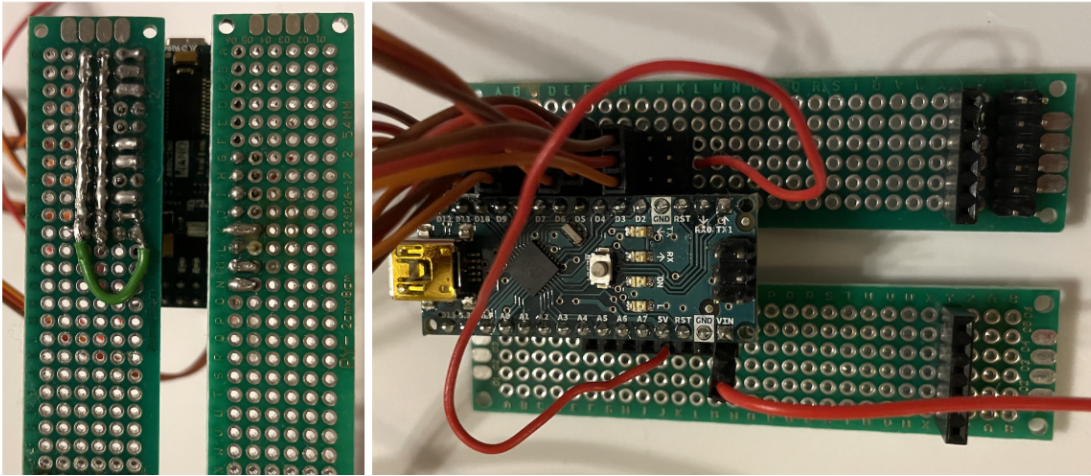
Bottom (left) and top (right) view of the TinyRHex robot control circuit board featuring modular designed hot-swap sockets to allow easily changing servo motors and Arduino without soldering and desoldering.
